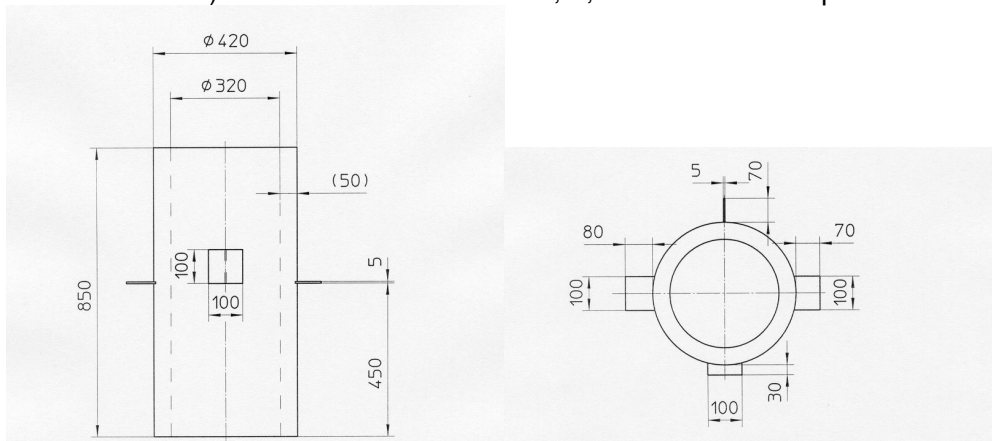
Thick-walled steel cylinder with welded-on steel plates simulating crucible cracks
